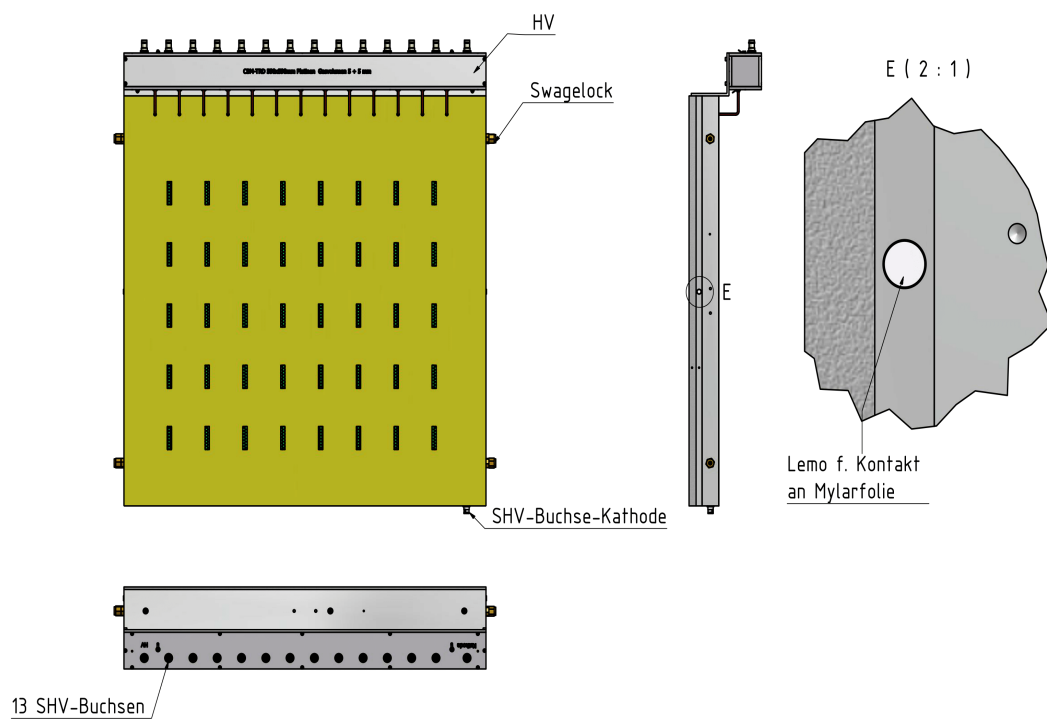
Rear, side and upper view of the full size prototype with the 13 HV channels.
